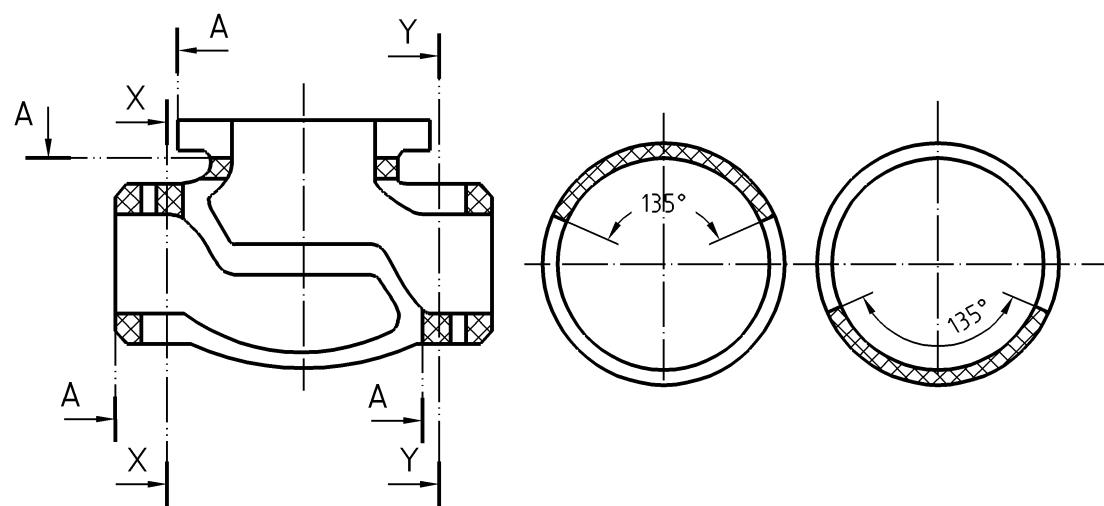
Typical casting section showing required radiographic examination of globe valve body (flanged bonnet)
